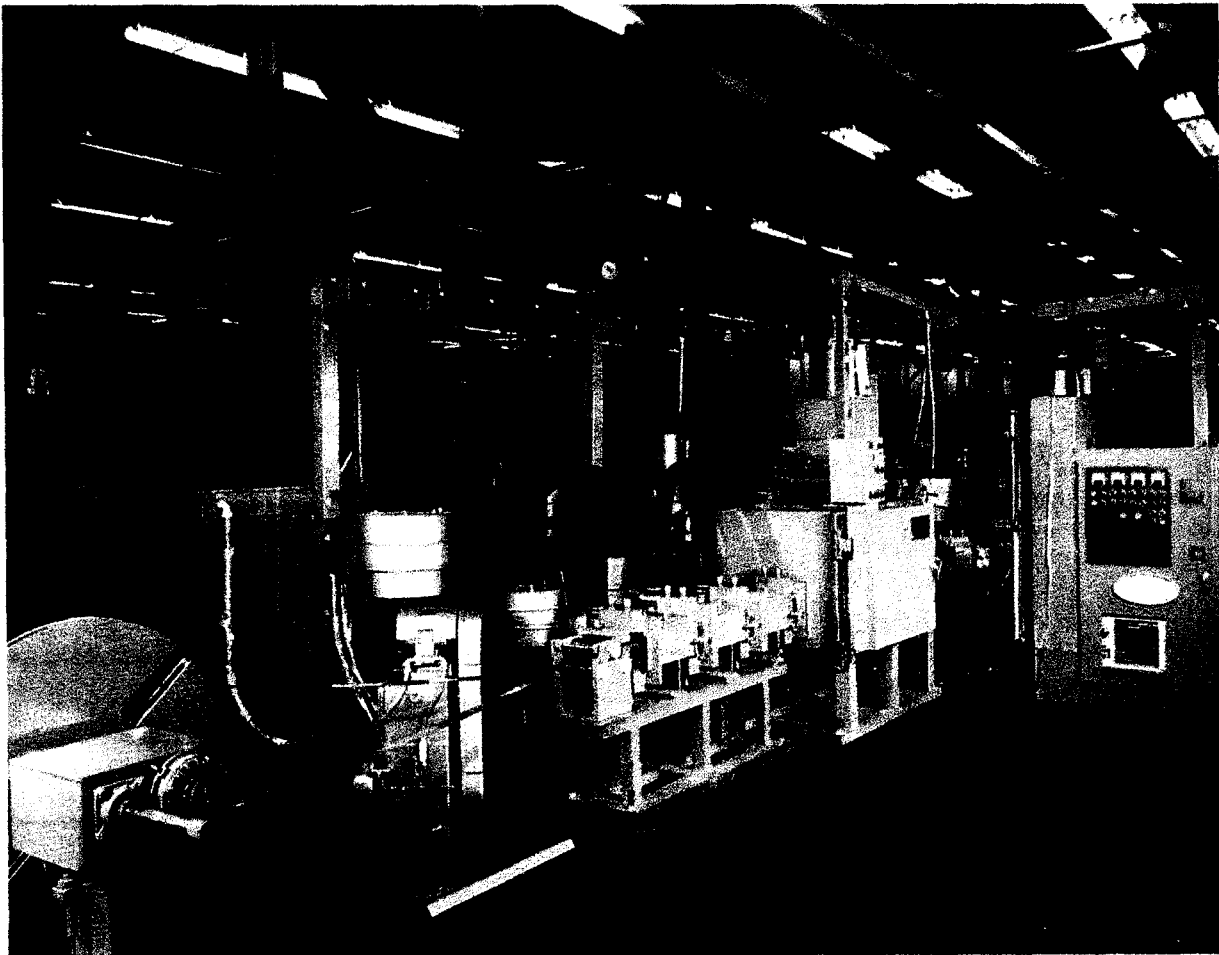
Electron Beam Welding Machine Designed for Joining Bimetallic Strip
